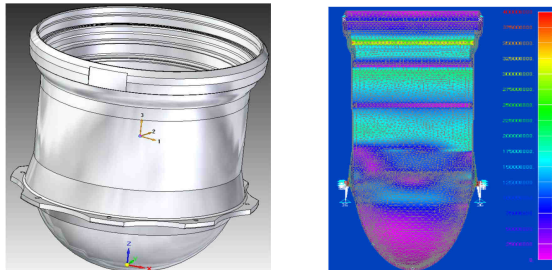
CAD drawing of the inner vessel and some stress analysis results
